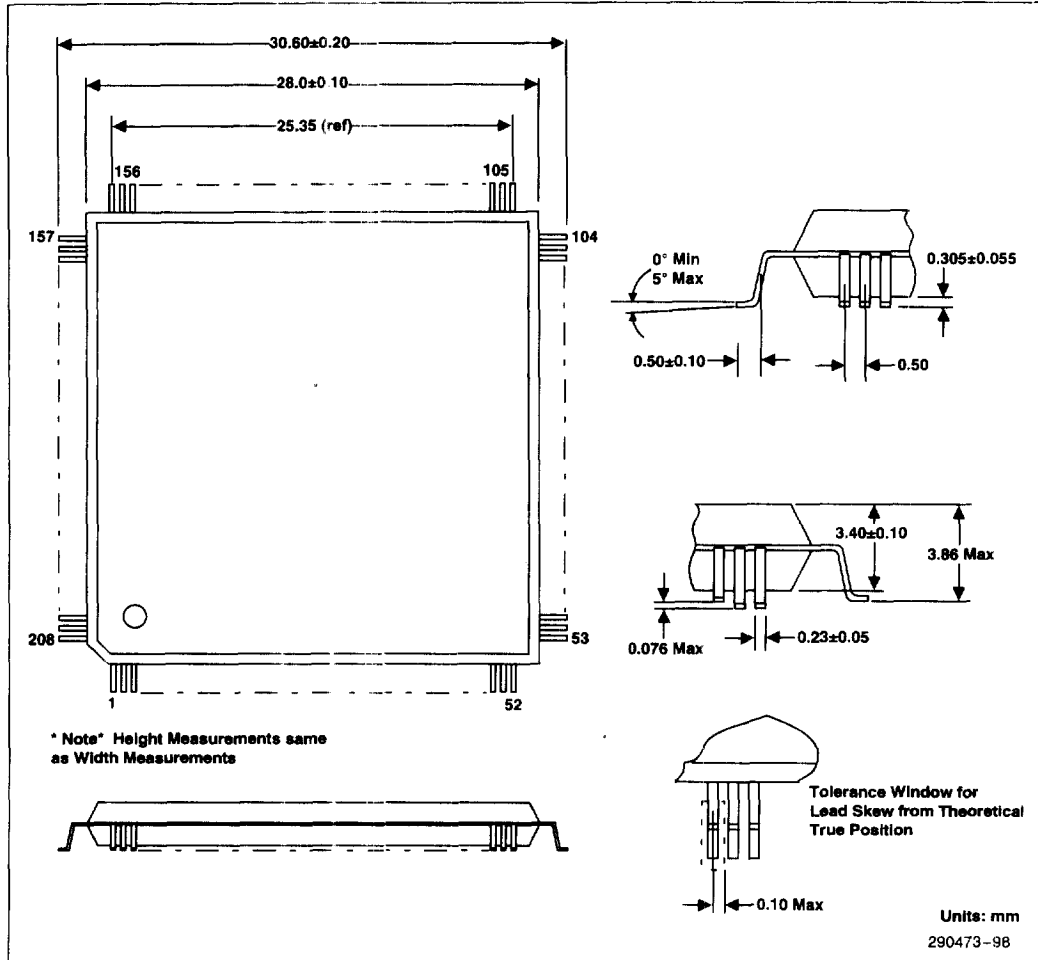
208-Pin Quad Flat Pack (QFP) Package Dimensions
